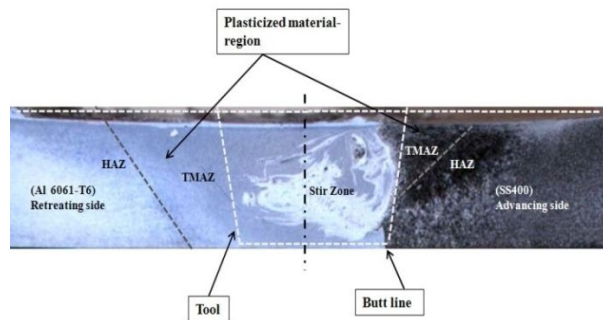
Tool work piece geometry for TAFSW experiment
